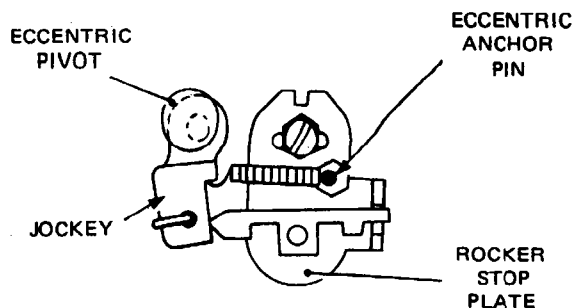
JOCKEY MECHANISM (REAR VIEW)
